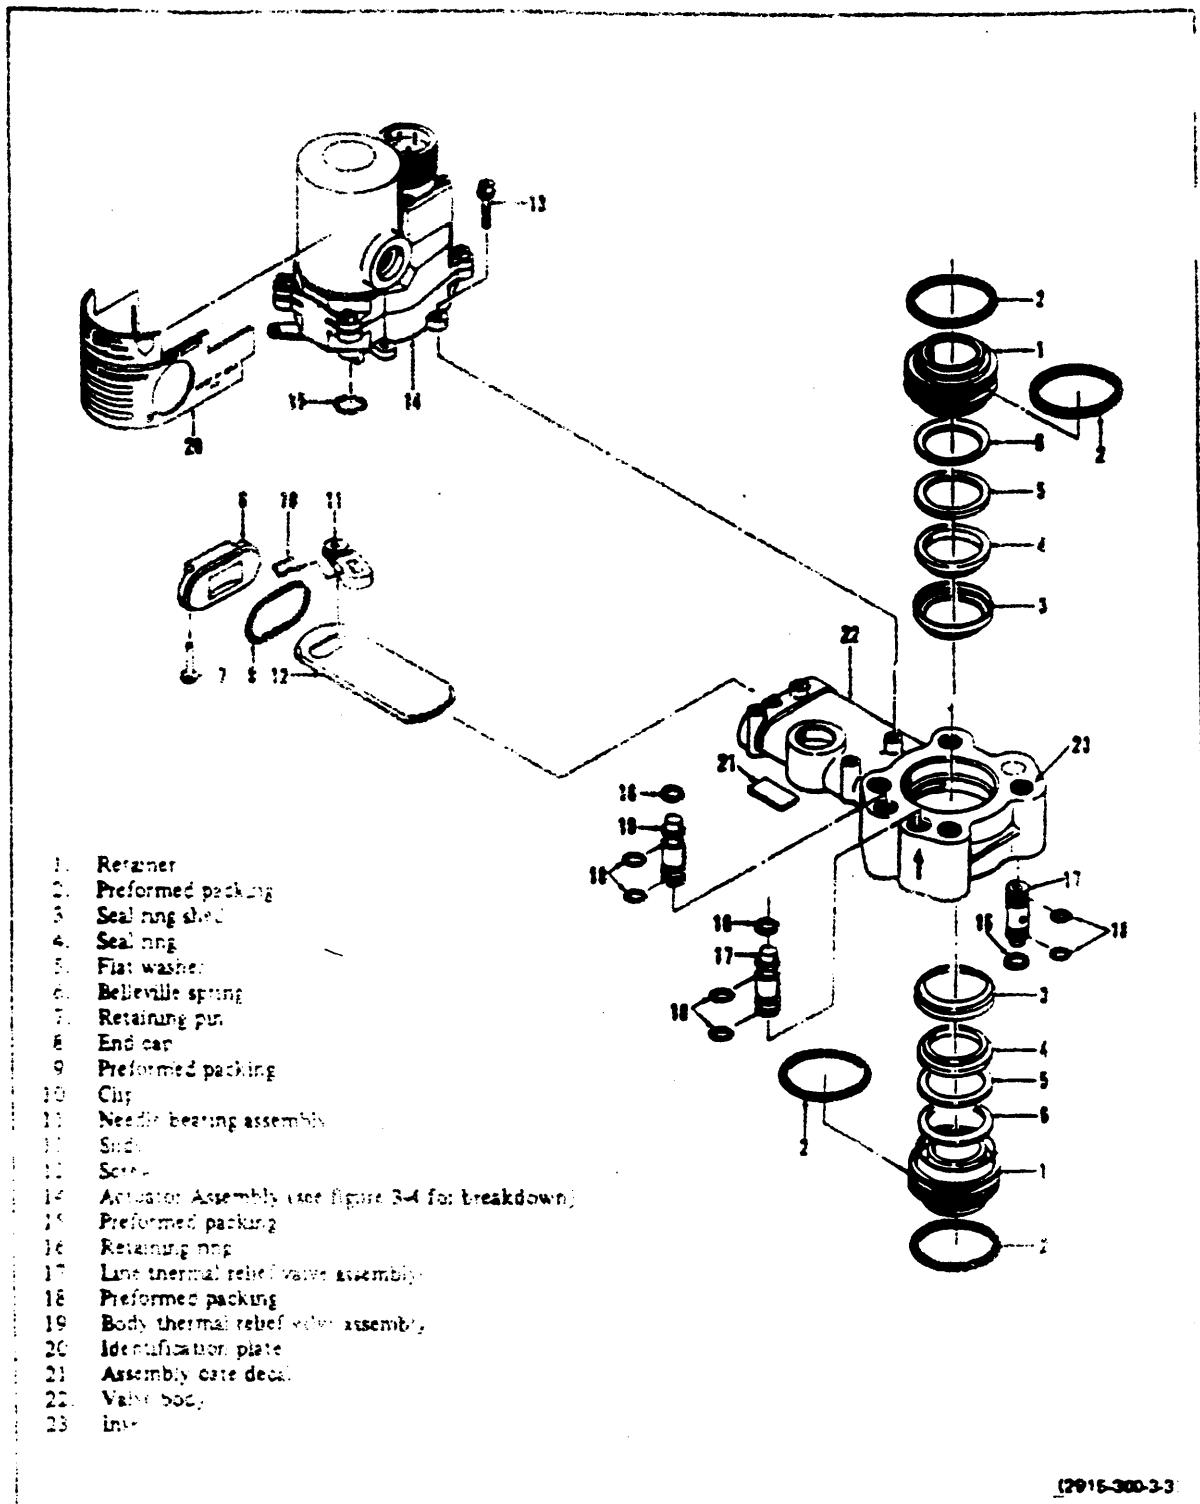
Gate Shutoff Valve Assembly, Part No. AV16B1700B
